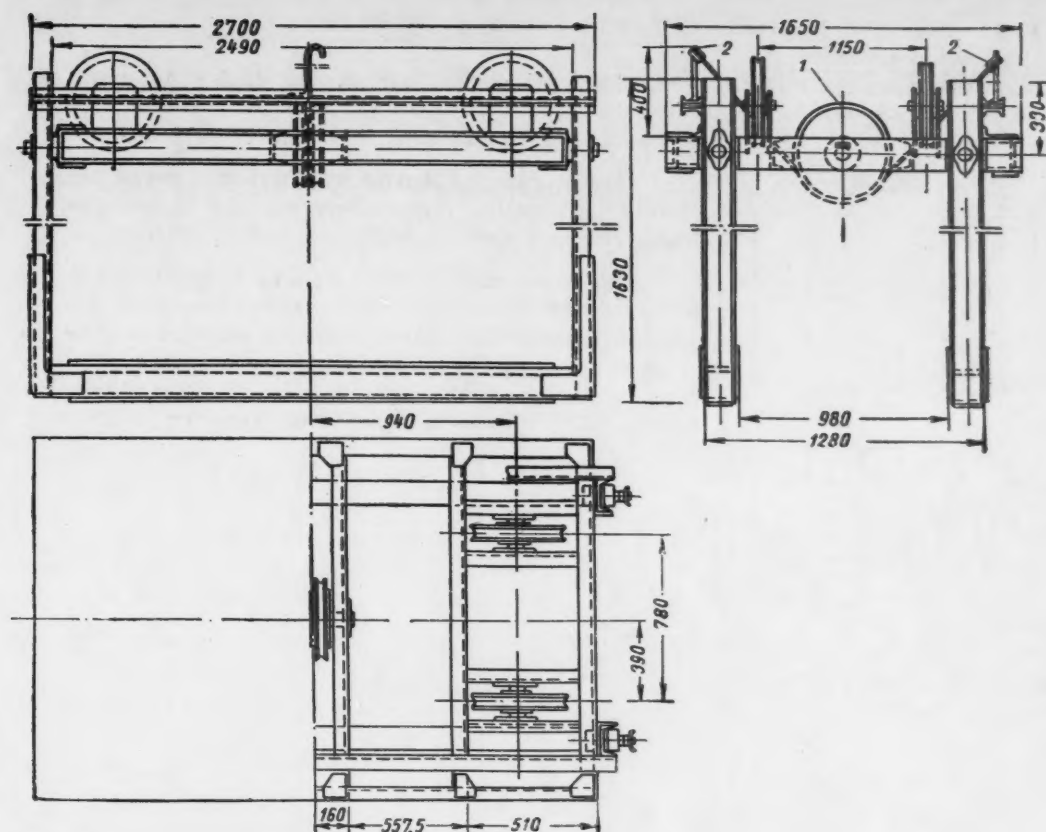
Device for clamping molds. 1) Roller; 2) lever.
